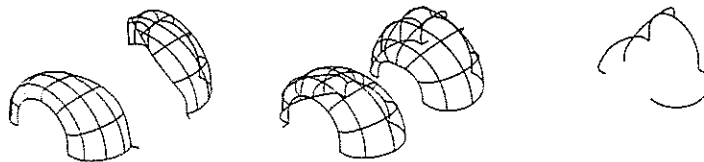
Trimmed surfaces, base surfaces, and wires of the front fenders
